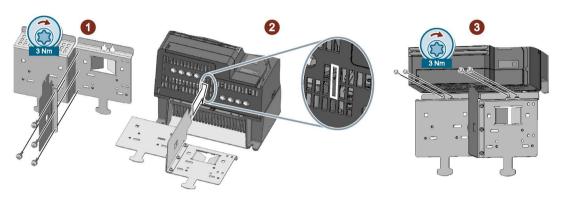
Mounting the lower shield plate, FSD and FSE
